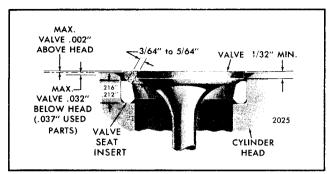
Relationship Between Exhaust Valve, Insert and Cylinder Head (Two-Valve Head)
